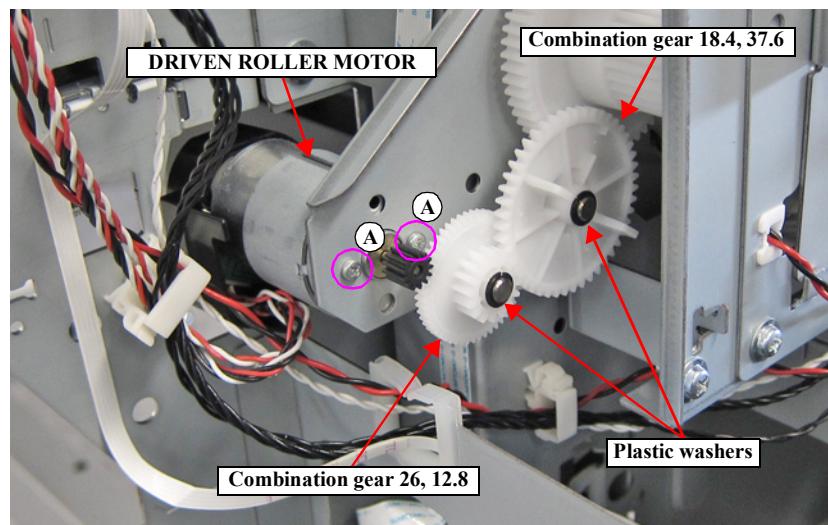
Removing the Combination gear 26, 12.8 and Combination gear 18.4, 37.6
